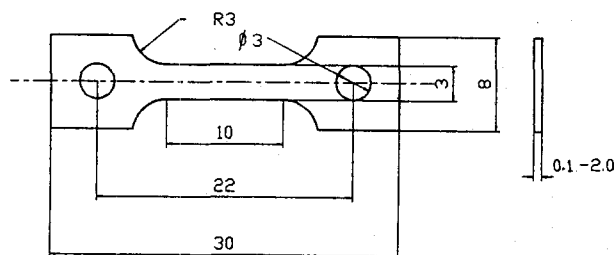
Geometry and Dimension of Miniature Plate Tensile Specimen (Unit : mm)
